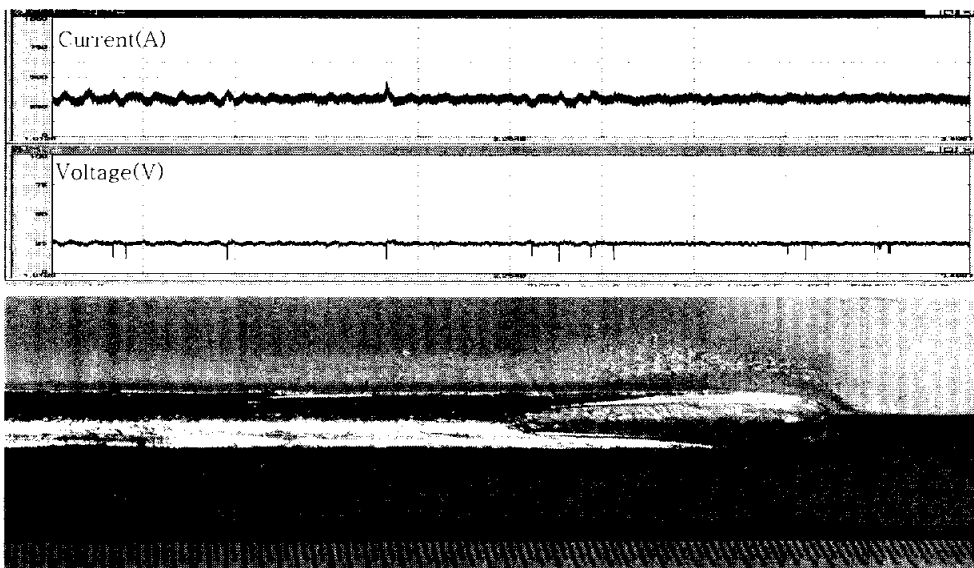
Waveforms and bead shape at welding current 328A
